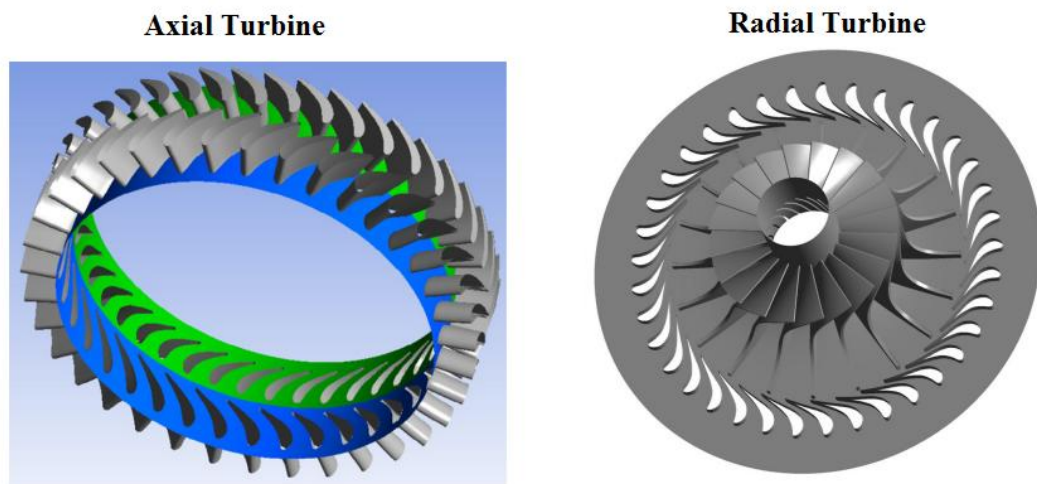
3D geometries of axial turbine (left) [173] and radial turbine(right) [174].
